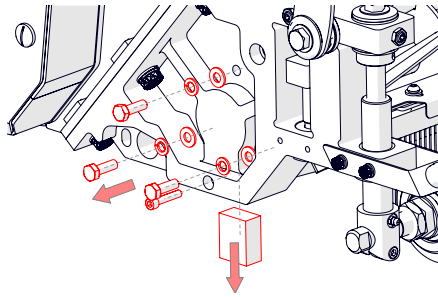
M - Remove bolts from RH cylinder bearing, and central shaft
